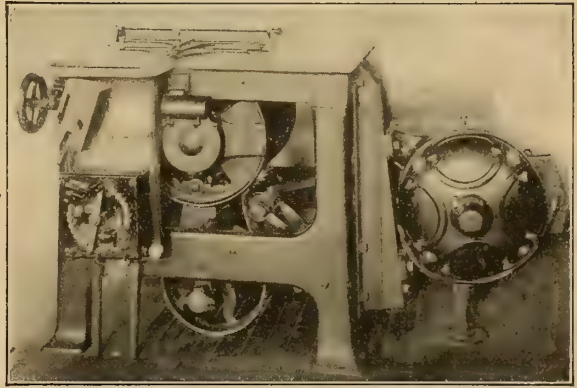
CIRCULAR SAW BELTED TO GENERAL ELECTRIC CO.'S CE4-3 H.P.-1200-500-FORM B MOTOR. S. A. WOODS MACHINE CO.
